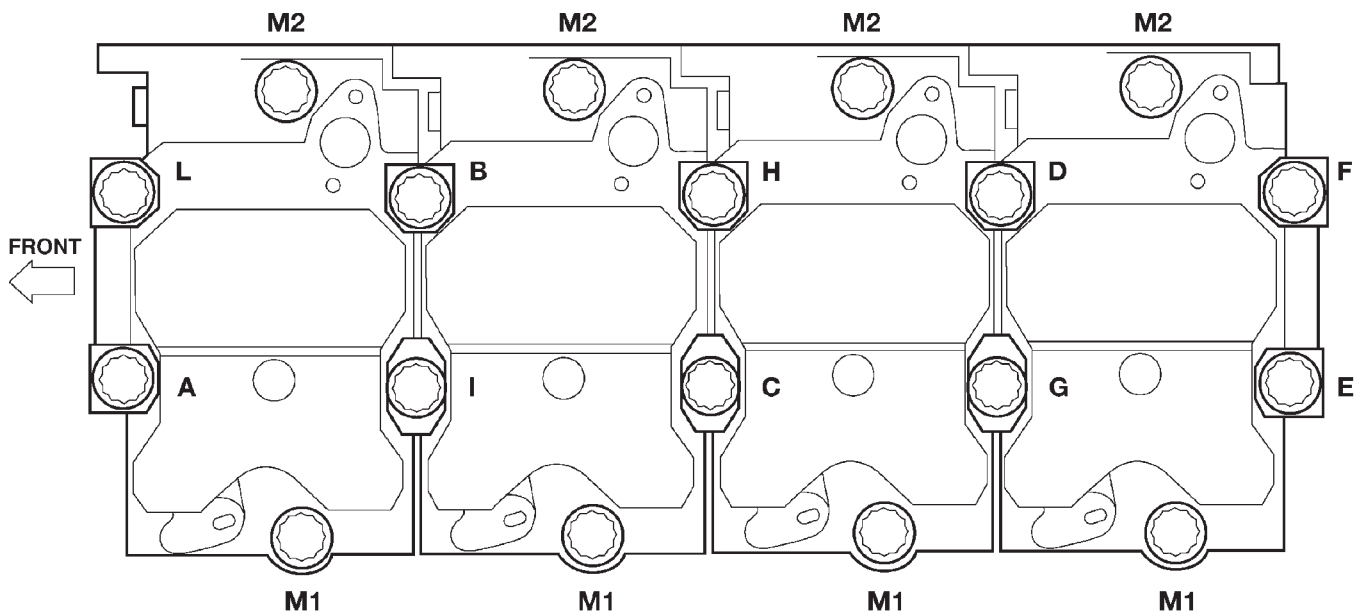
Engine Cylinder Head Bolt Tightening Sequence
